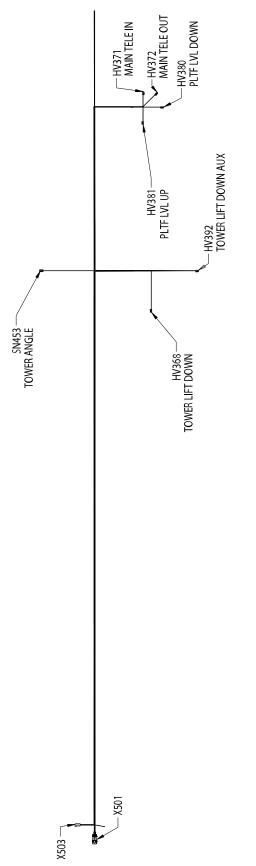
Tower Upright Valve Harness - Sheet 2 of 4
